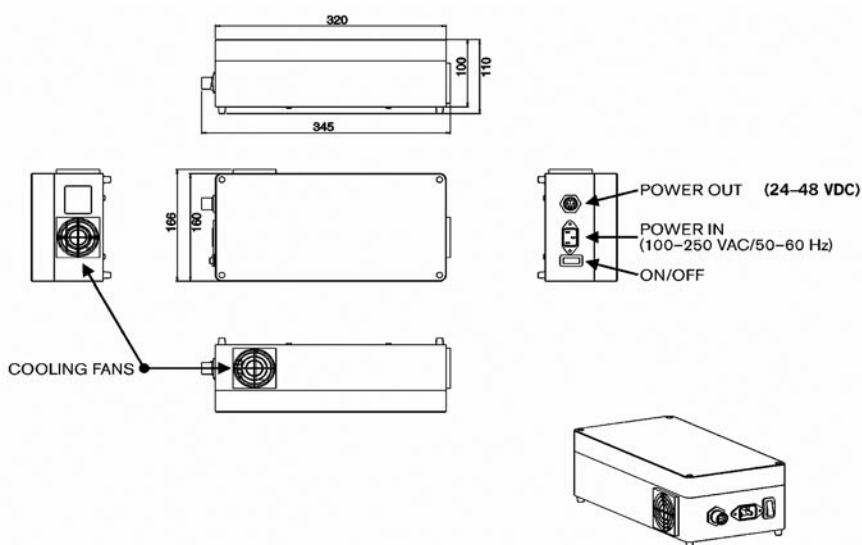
Basic dimensions – Power supply (PS) (Basic dimensions in mm).
